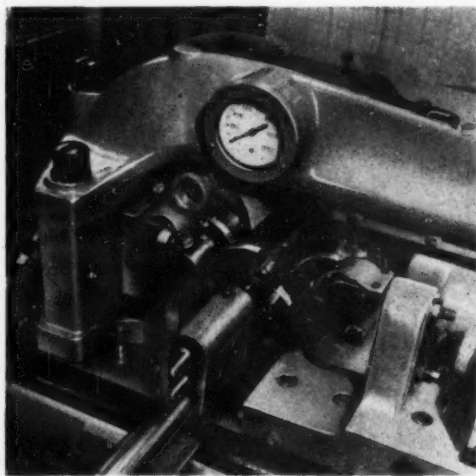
Steidle No. 1 Thread Rolling Machine Set Up for Rolling Oil Grooves in the Crankshaft
